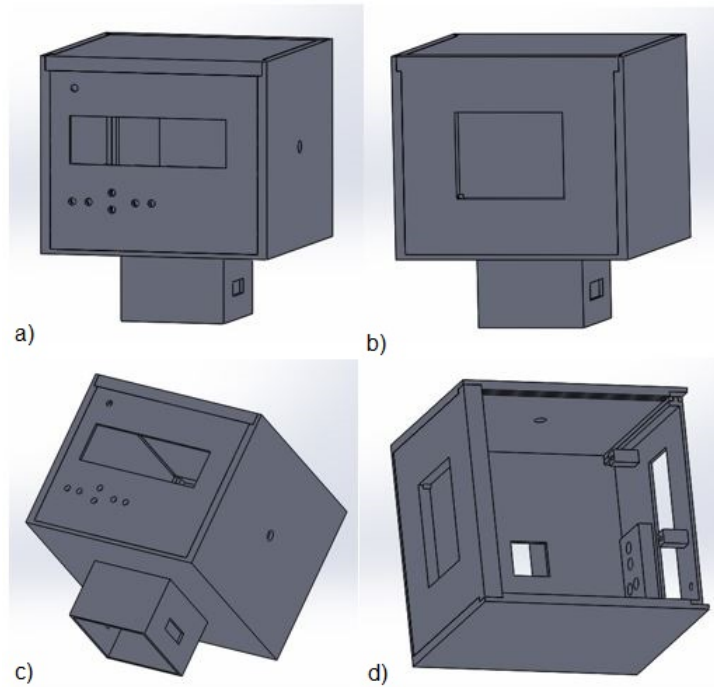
3D drawing of stroboscope design a) front view b) back view c) bottom view d) top view
